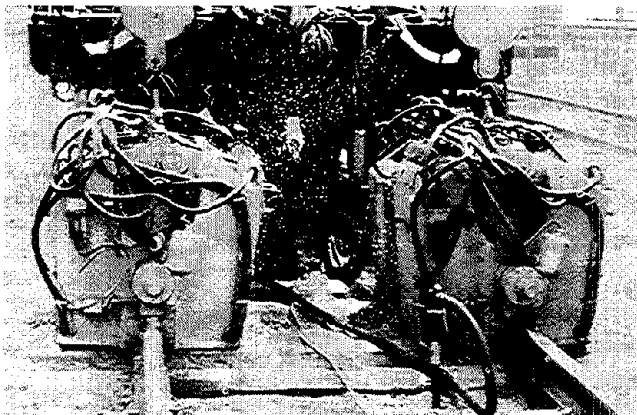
Soviet dual welding line application using two in-track welders in tandem.
